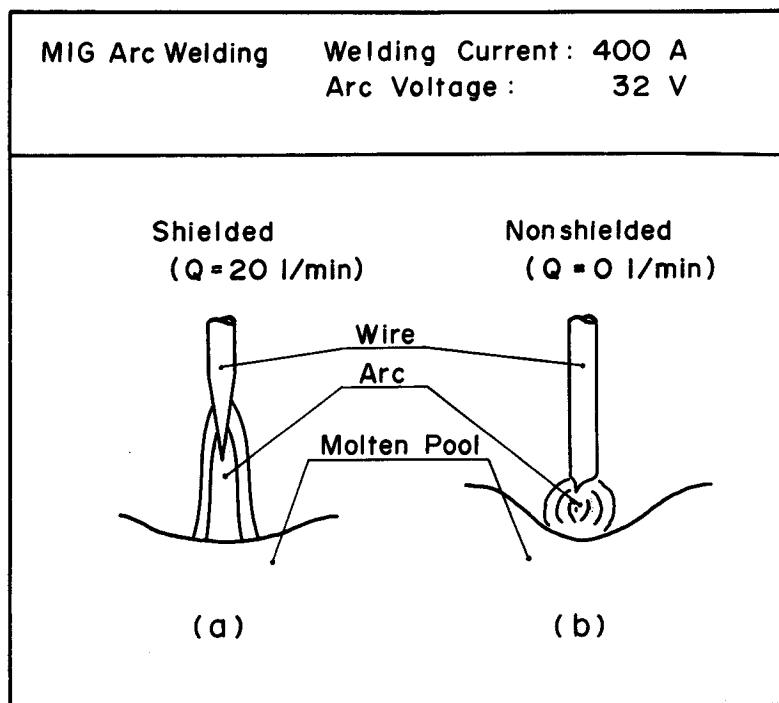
25 Difference of arc shape of MIG arc welding at different shielding condition.
